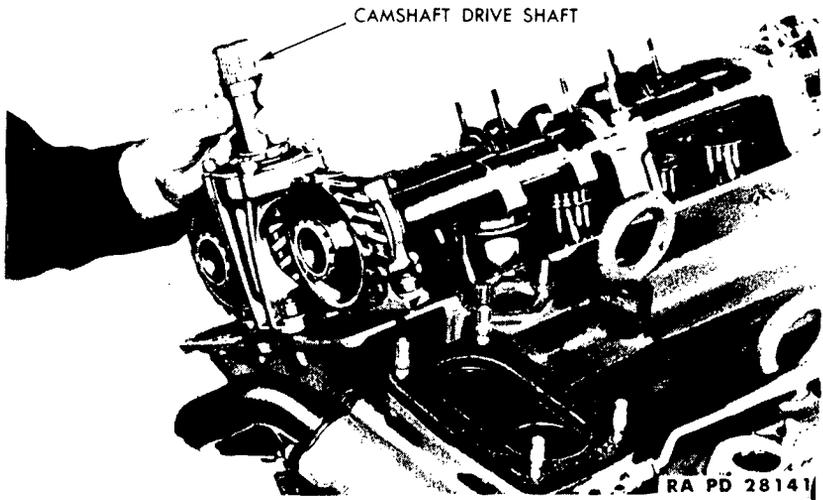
Inserting Camshaft Drive Shaft (Upper)
